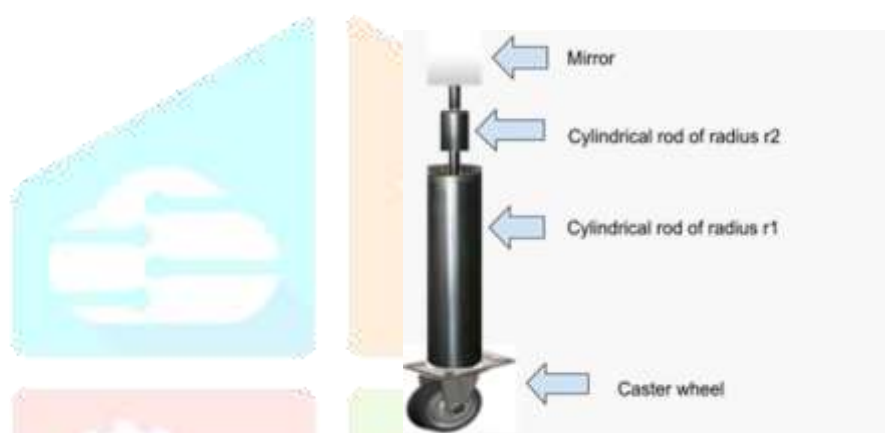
Component layout of a vertical sensor mounting assembly, demonstrating how a caster wheel and concentric cylindrical rods are integrated for mobility and mirror placement. (Note: Image generated using OpenAI, 2025)
